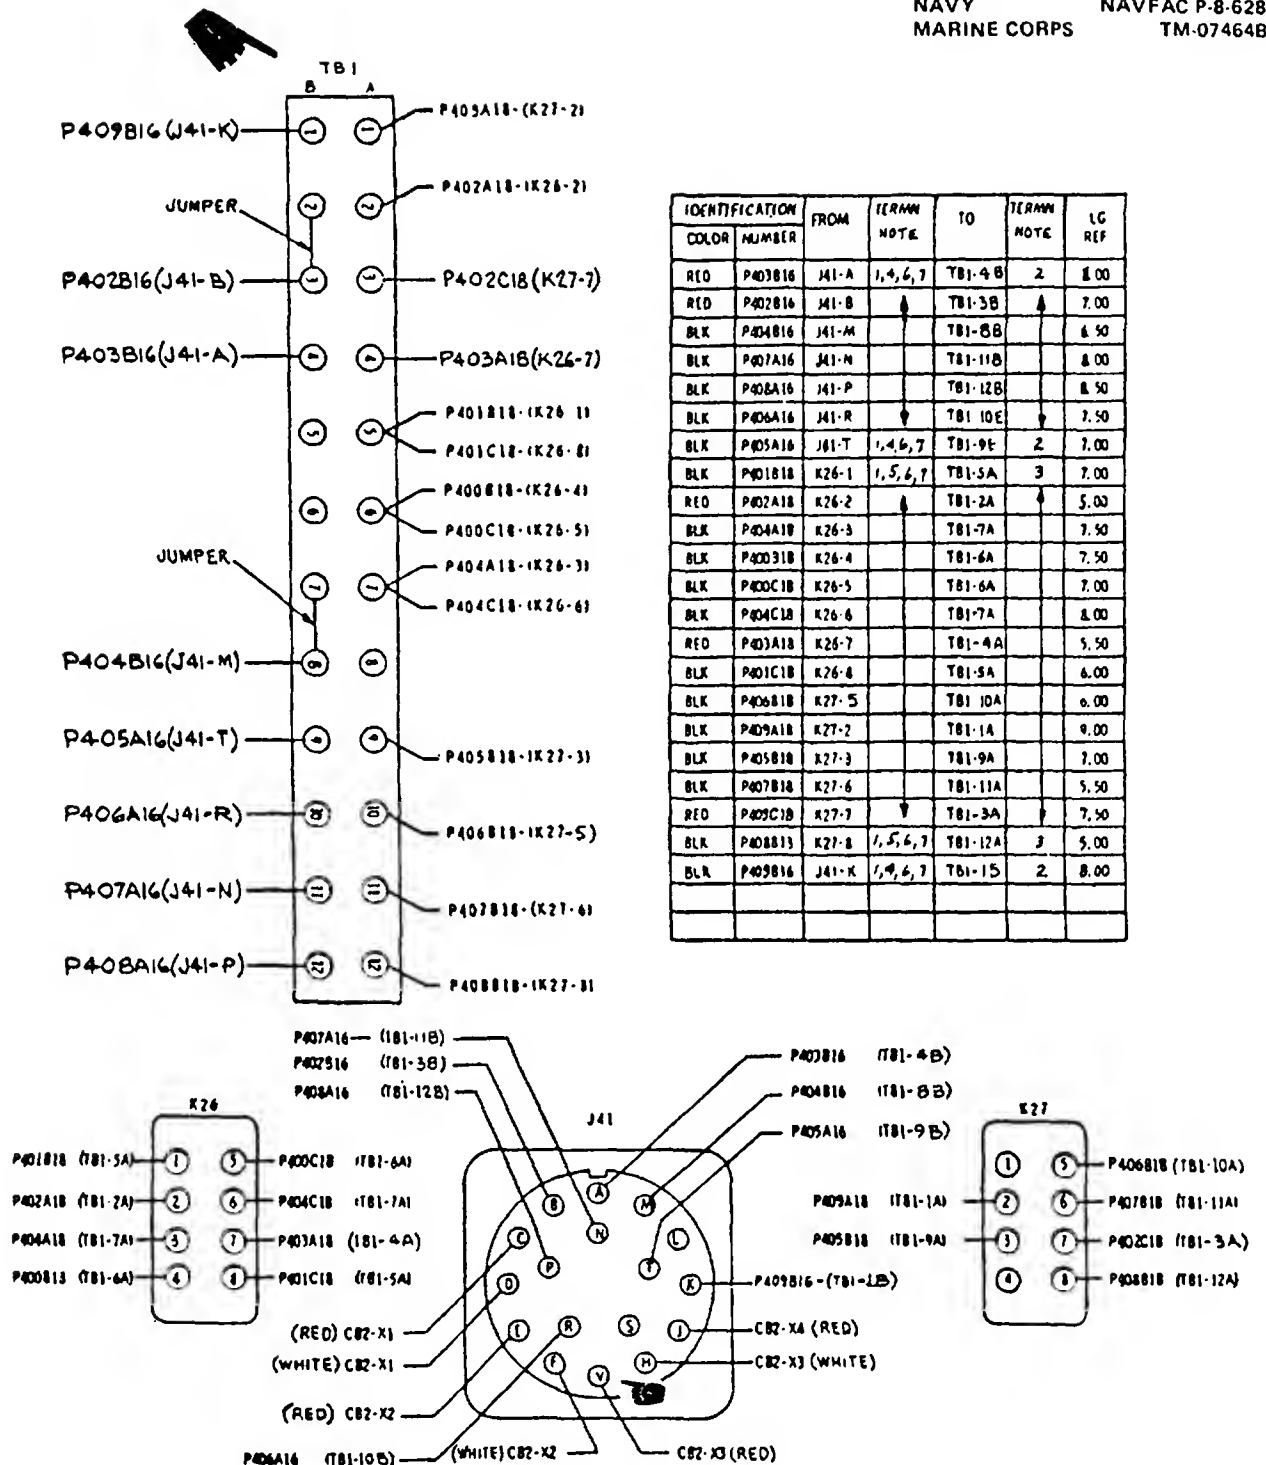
Circuit Breaker Assembly CB2, Relay Box Wiring Diagram
